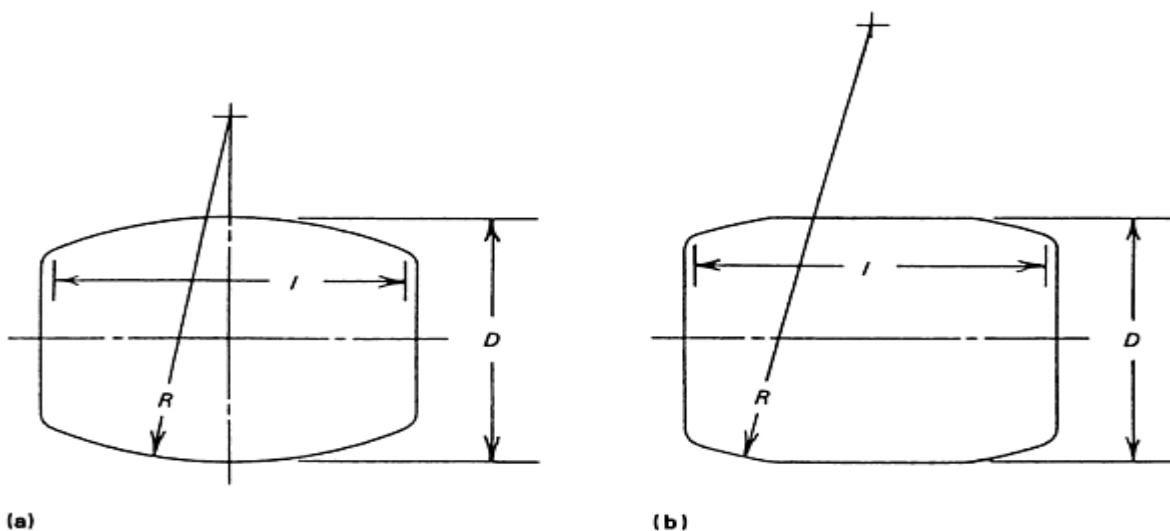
Crowned roller geometry used in radial roller bearings. (a) Fully crowned (spherical roller). (b) Partially
